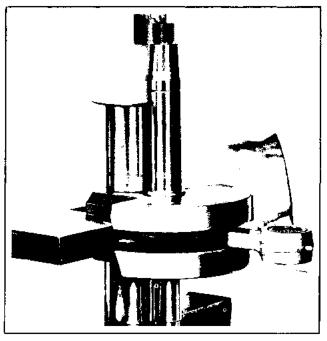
E-75. Finishing Pressing with Gauging Plate Installed Between Crank Throws (1963-1976)
